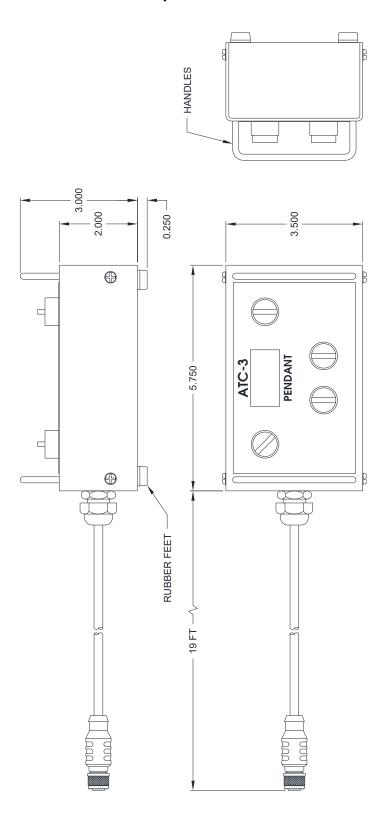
ATC-3 Operator Pendant Physical Dimensions
